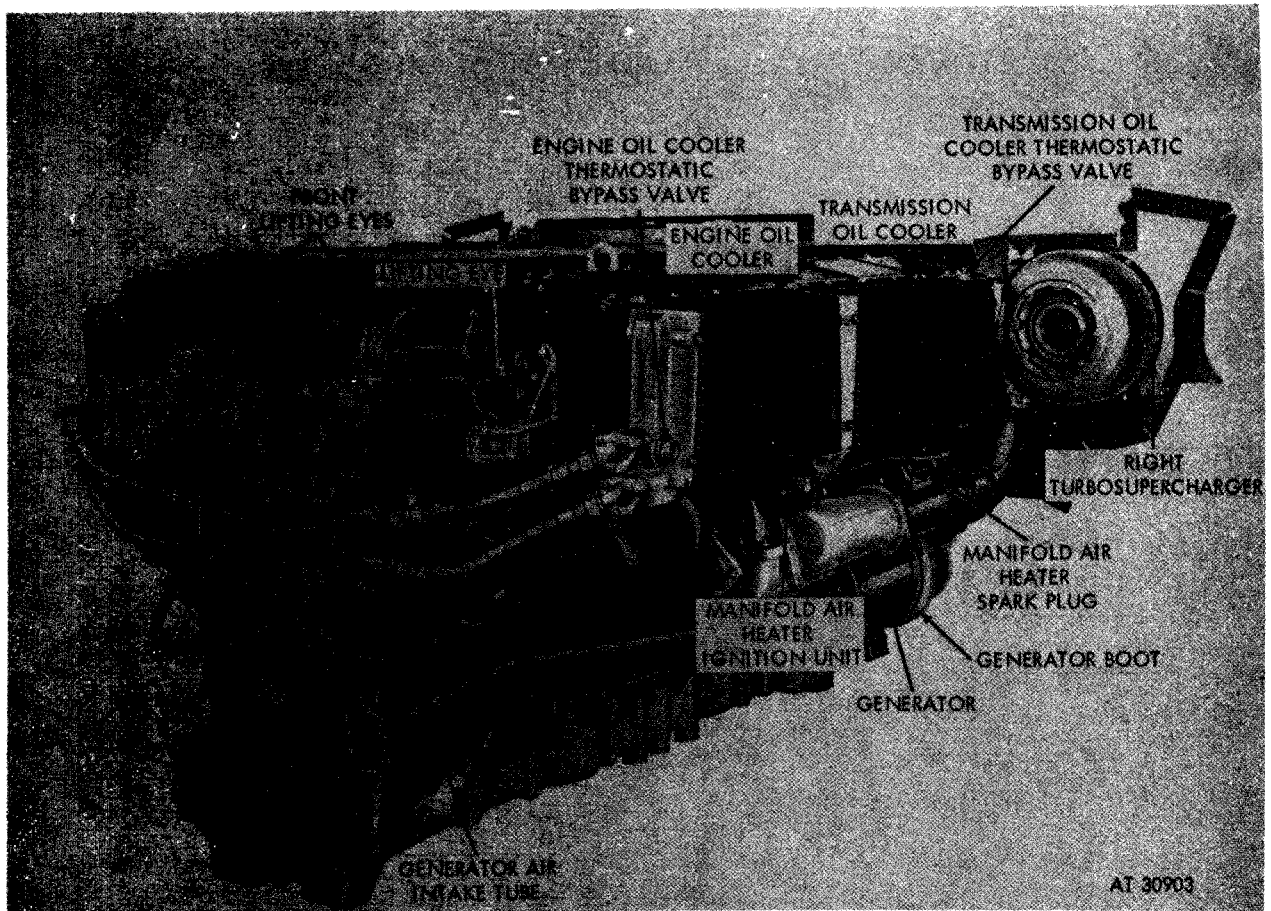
AVDS-1790-2A engine assembly with time totalizing meter-right front view.
